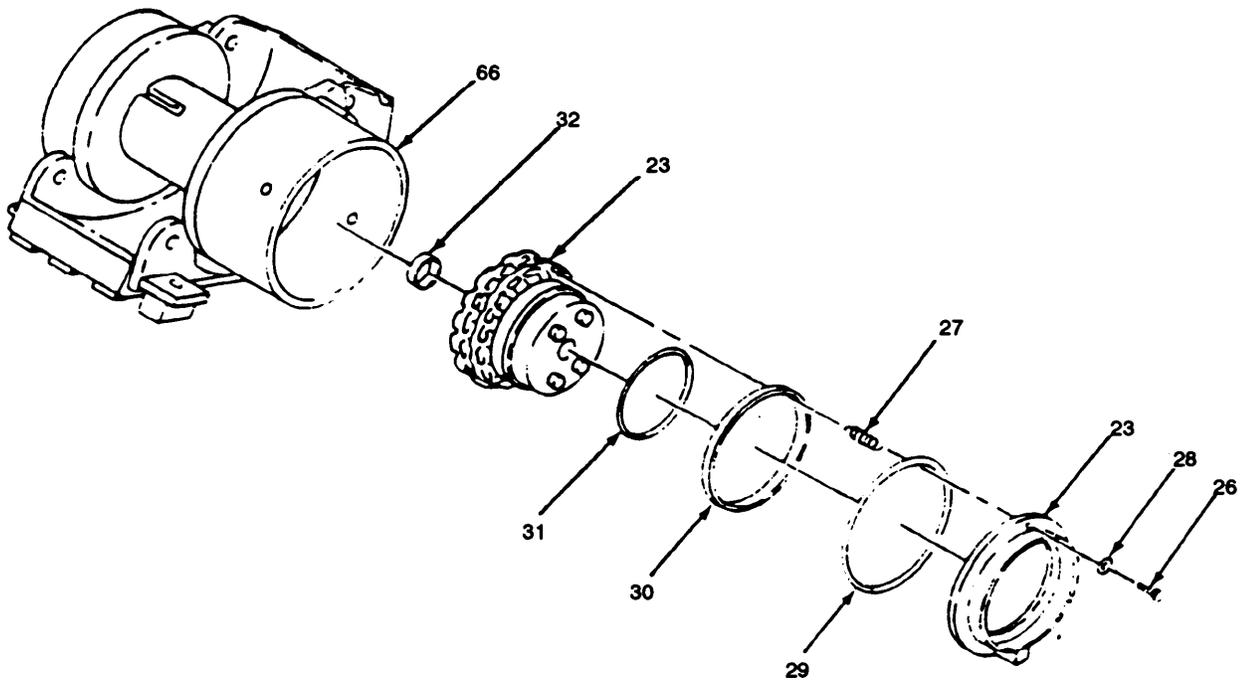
Winch Assembly Model 11-S-EC, Reassembly (Sheet 7 of 10).
